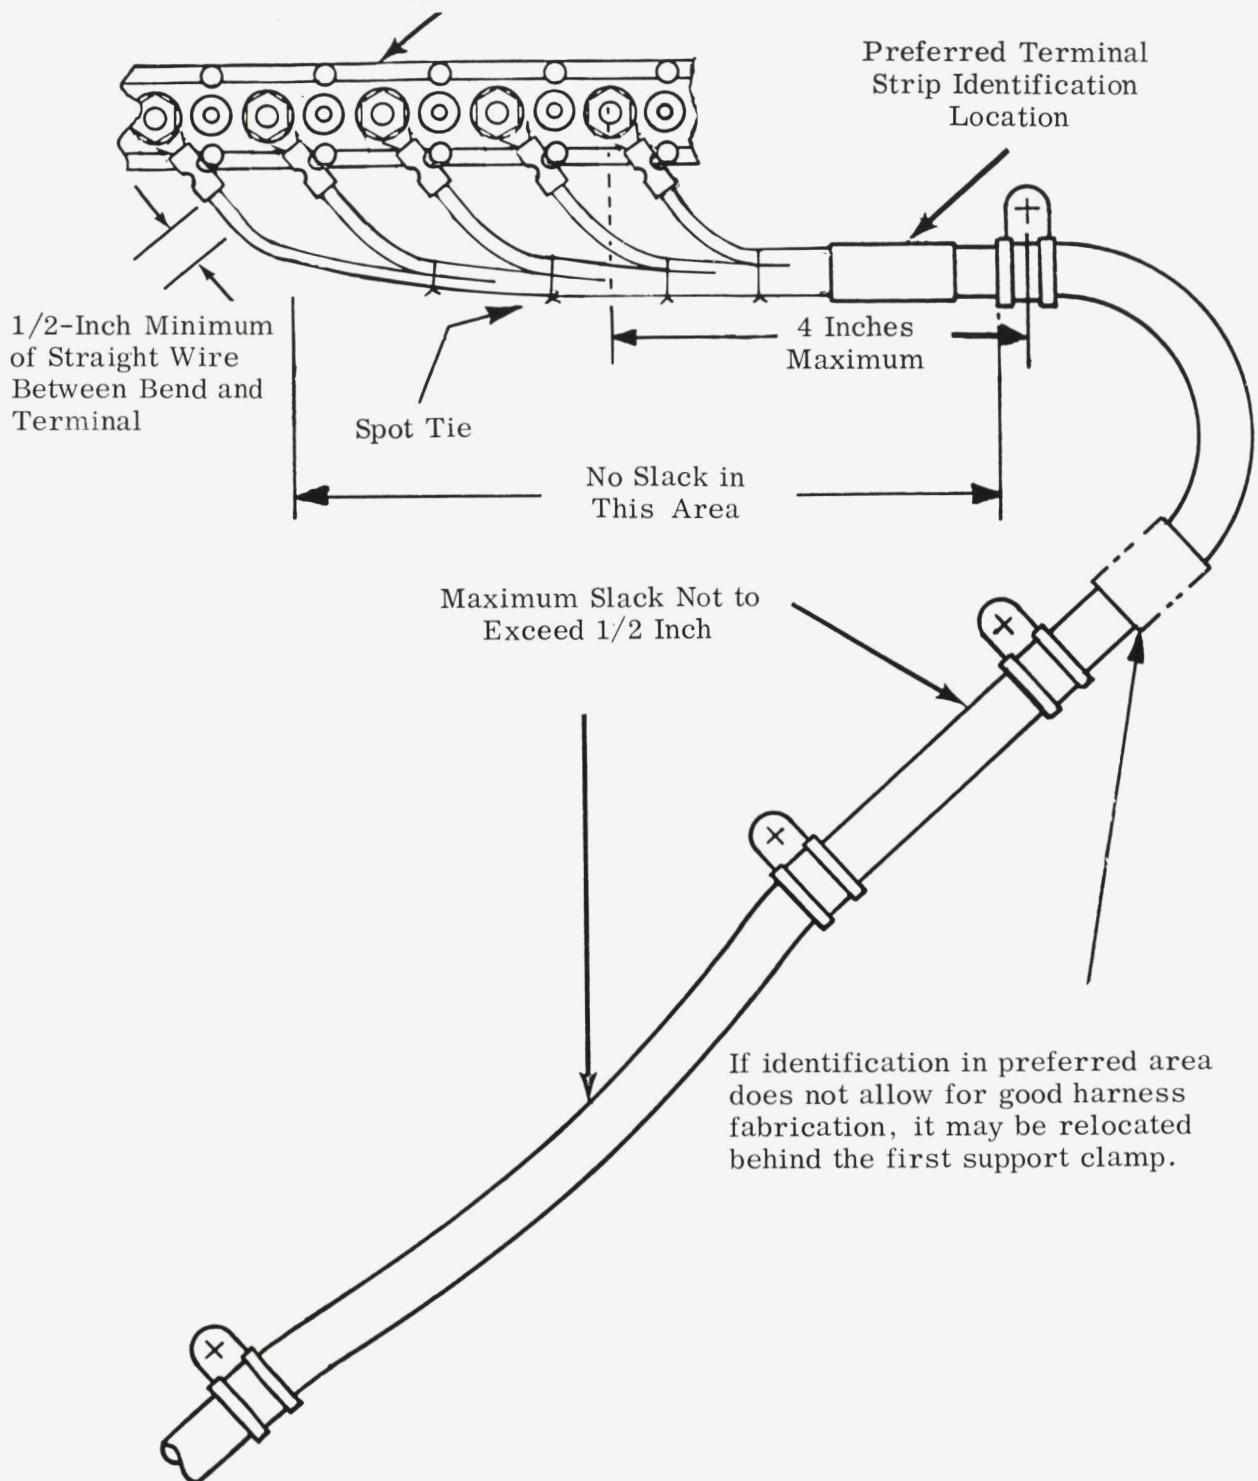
Approved Slack Between Stud Type Terminal Strip and Clamp
